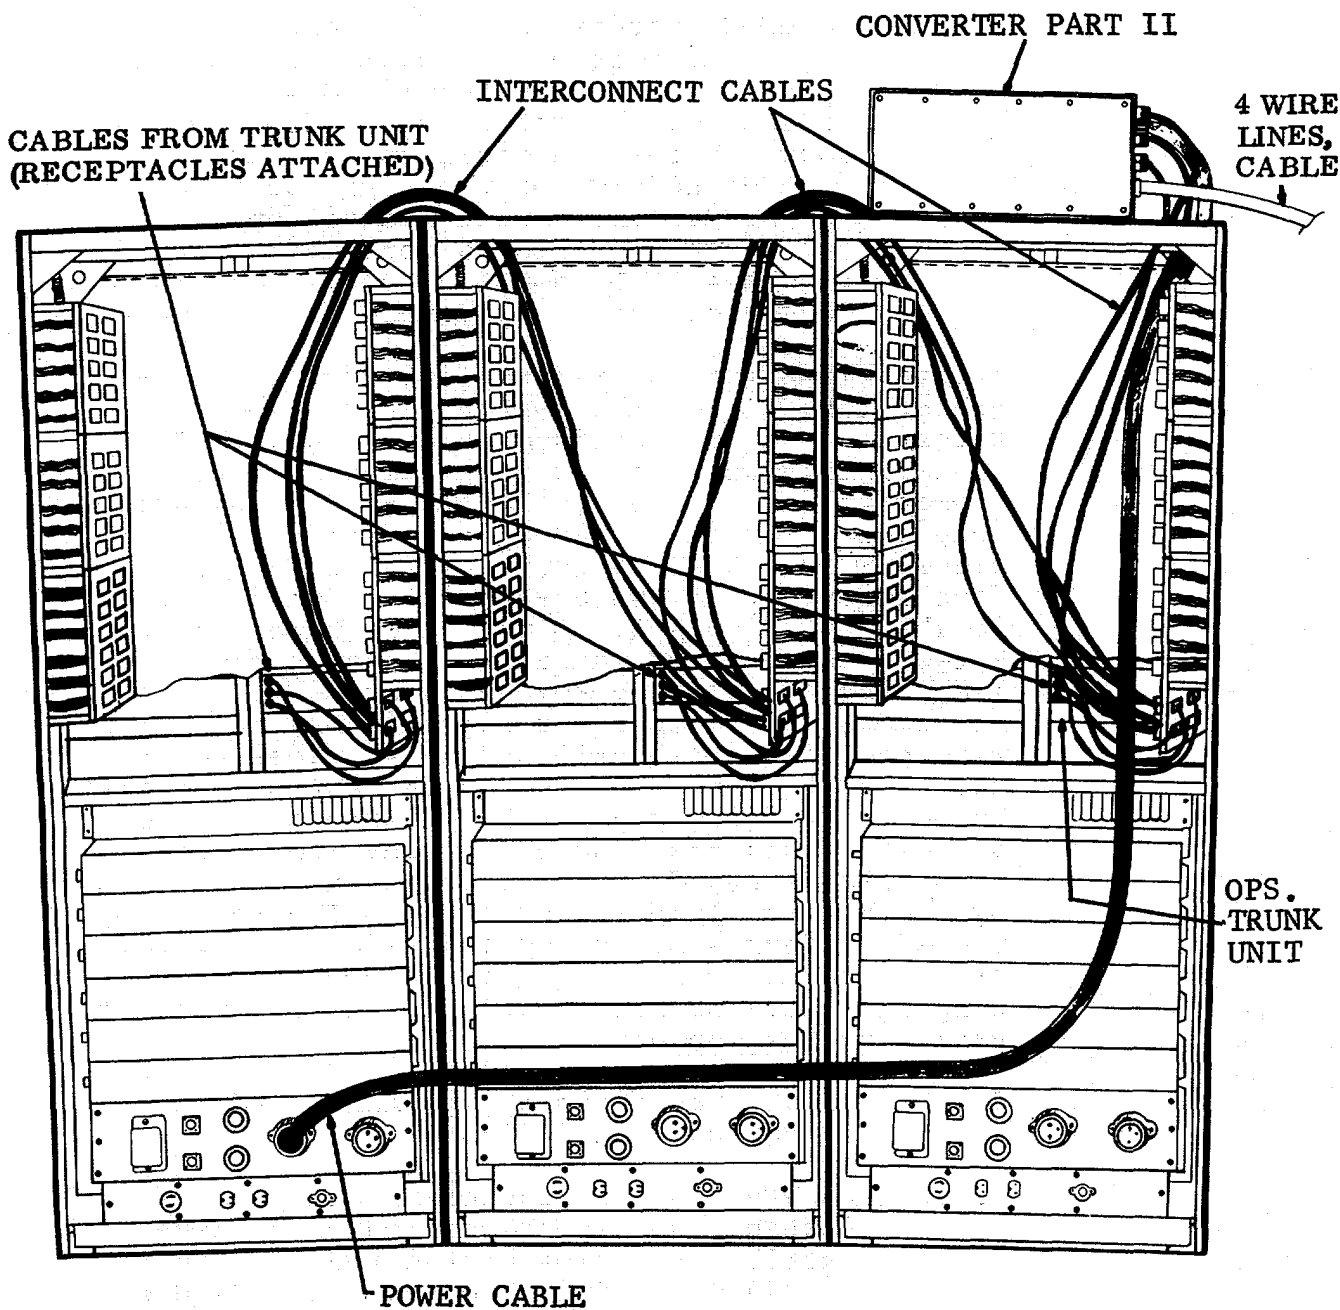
Operators Console, AN/TTC-7, Rear View
